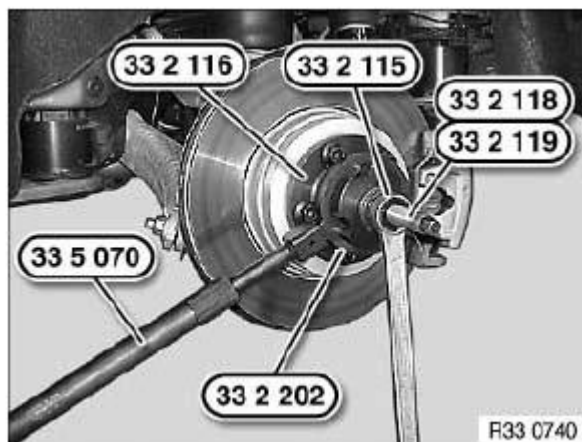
Identifying Special Tool (33 2 116) With Wheel Studs To Drive Flange
